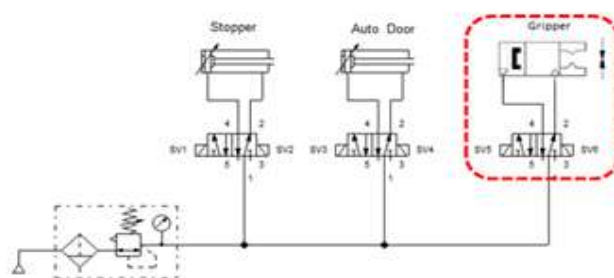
Pneumatic circuit of Goodway GV -500 achine
